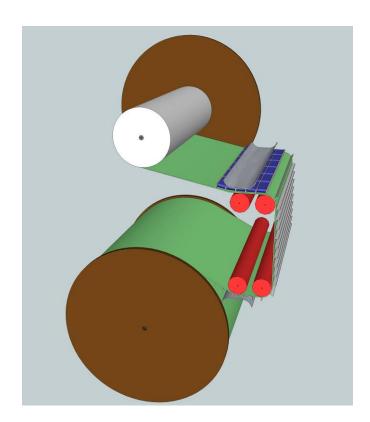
Nearly Empty Supply Roll (Top spool end removed for clarity)
